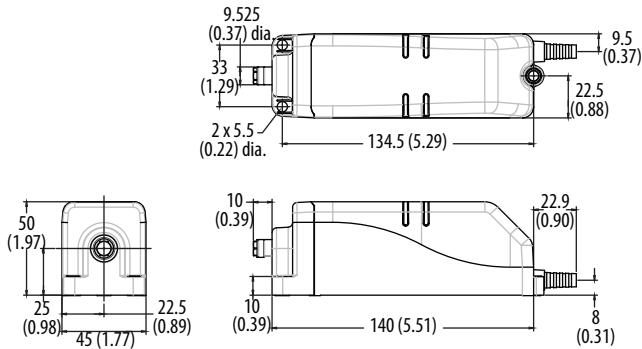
Switch Mounting Bracket (440G-LZAM2)
